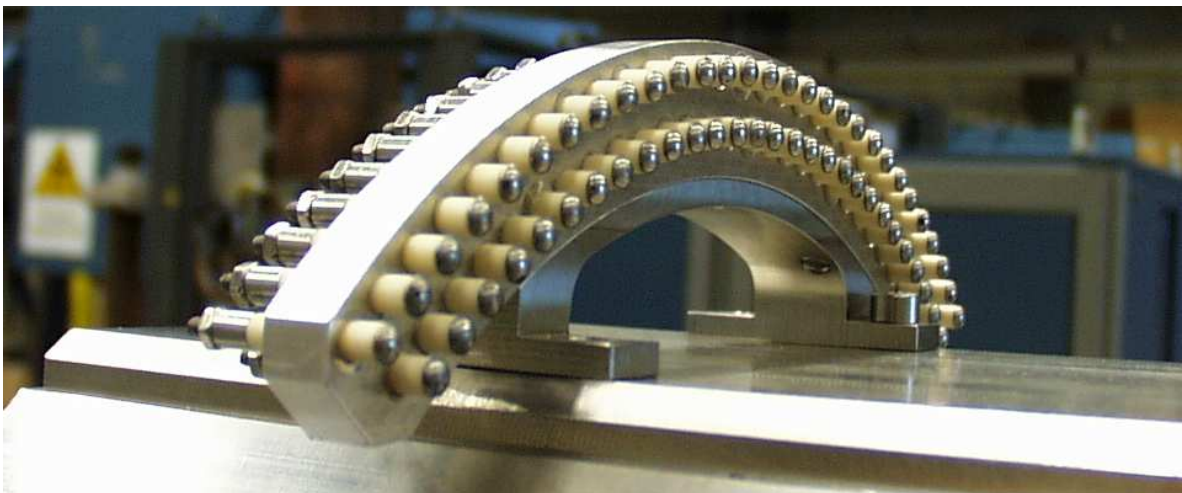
Picture of assembled structure of fixed pins. Pins are manufactured from steel rivets and aluminum-oxid sleeves.
